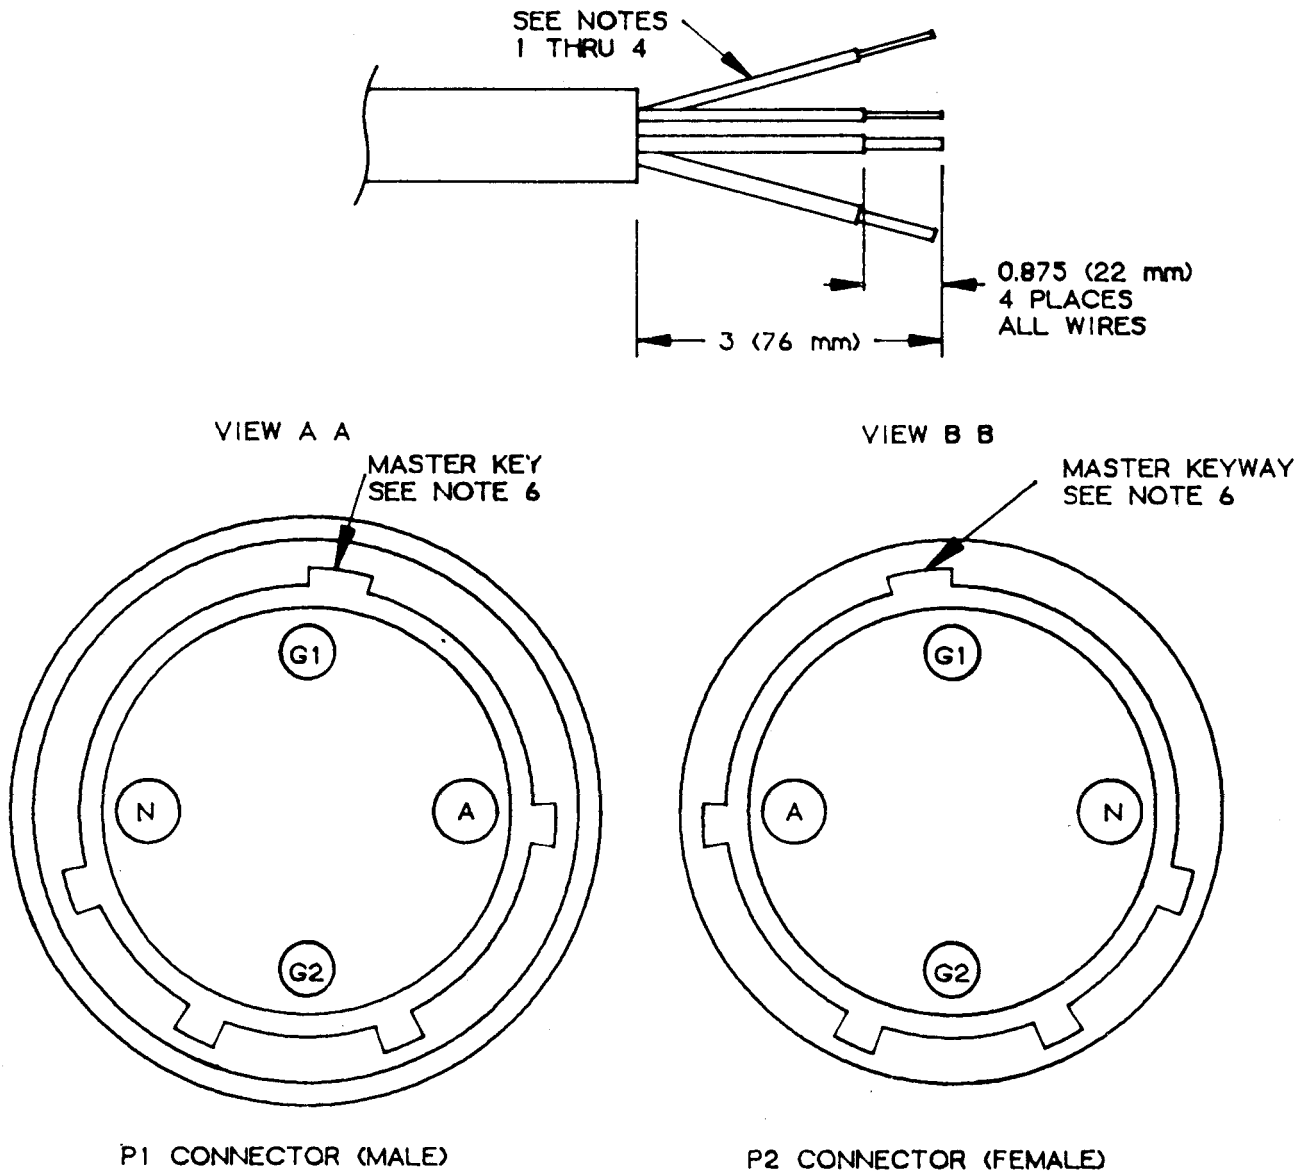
60-amp, 100-ft (30.5m) service/feeder cable. (sheet 2 of 3)
